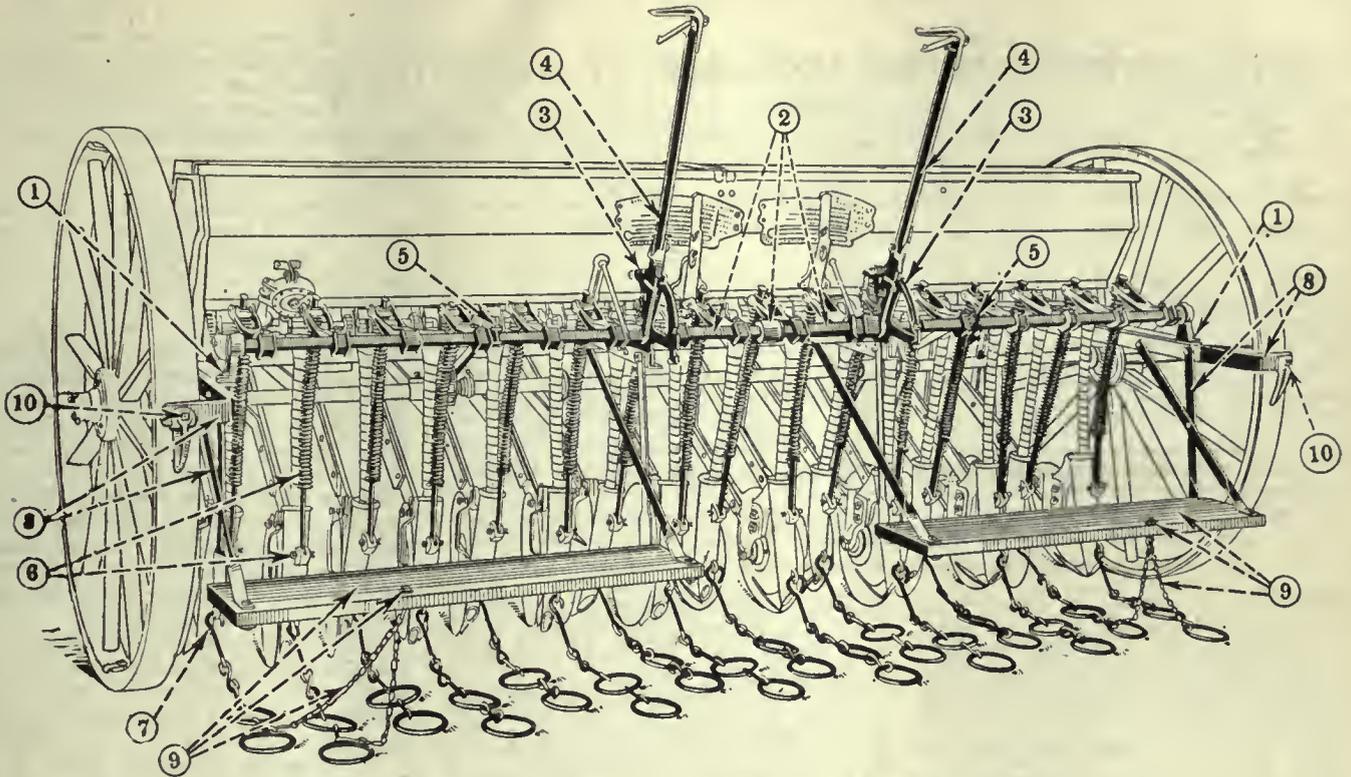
A LINE DRAWING ASSEMBLY OF A DEERING 16 MARKER SHOE DRILL.
